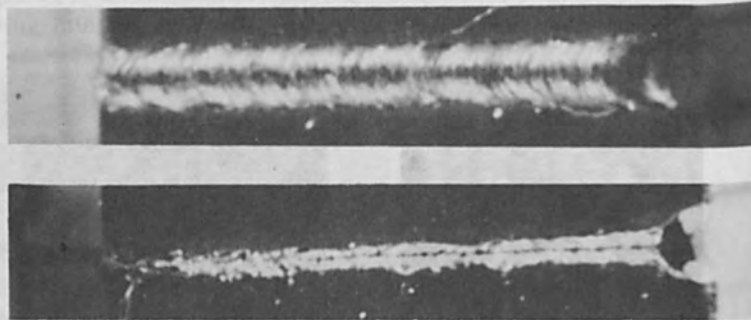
Butt weld of key stems, top and bottom. (magnification 13 x).
